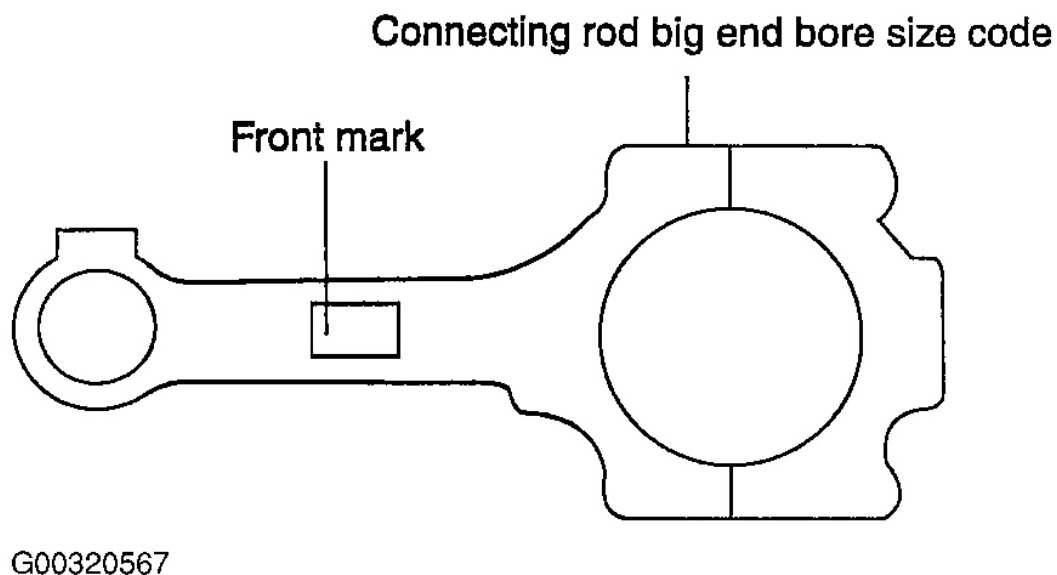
Checking Connecting Rod Big-End Bore Size Code
